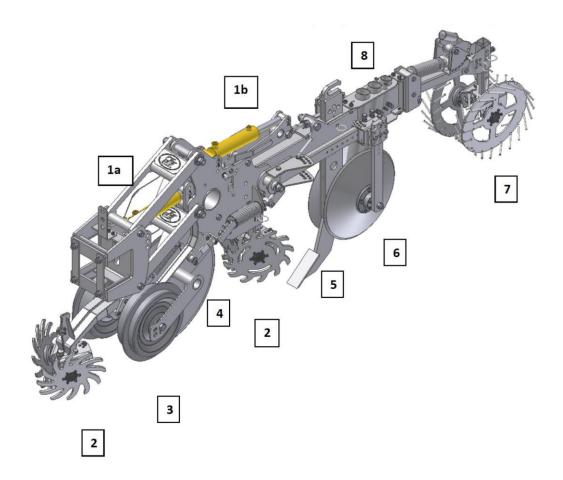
Machine supporting frame Eco Tiller 600 with work units.
